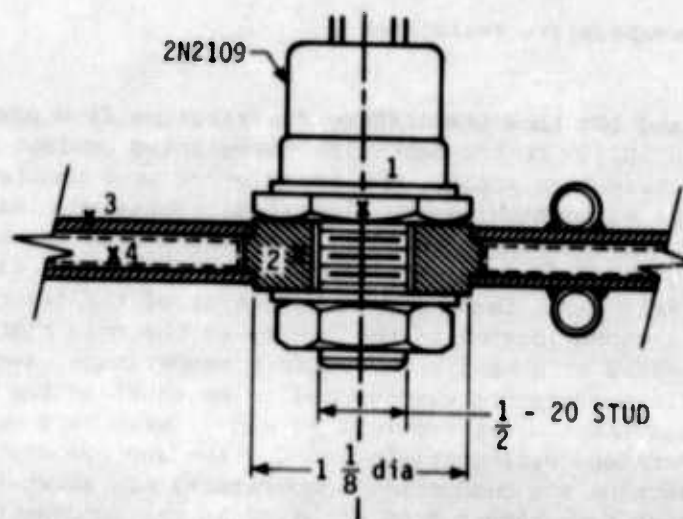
Section B-B of Heat-Pipe Cold Plate No. 6
